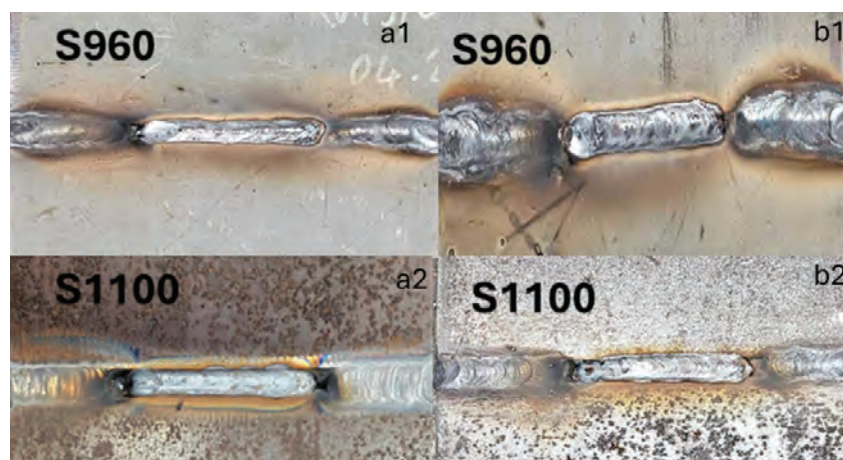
The a1 and a2 the welded joints without preheating, b1 and b2 the welded joints with preheating
